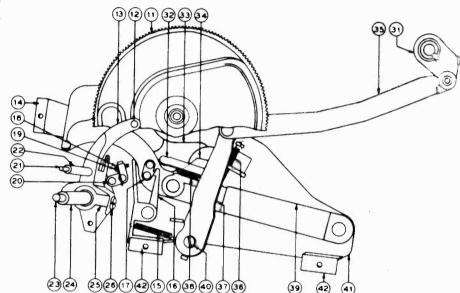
CUTAWAY VIEW SHOWING PARTS UNDER SUB-PLATE ASSEMBLY (83) FIG. 3
